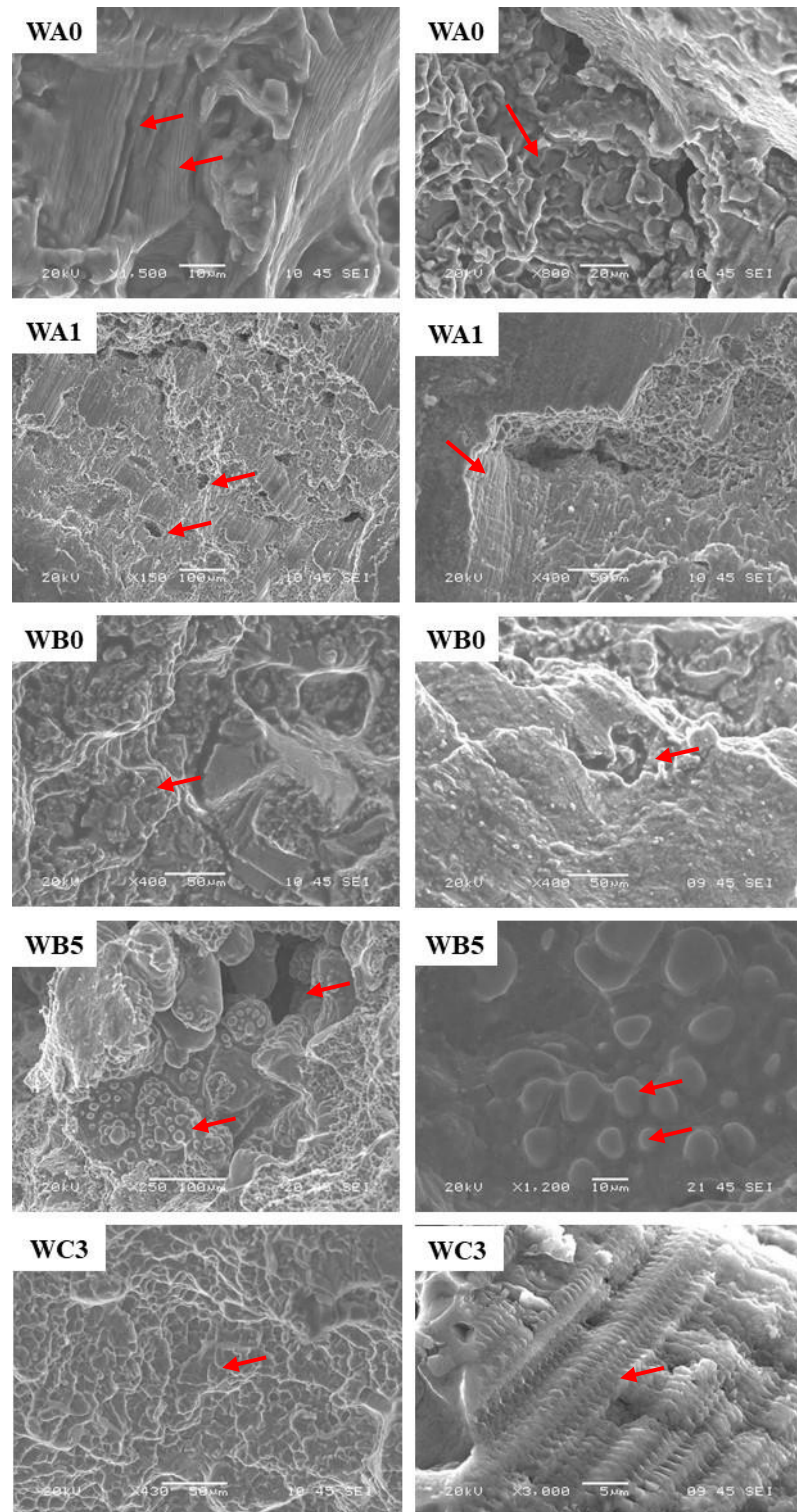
SEM imaging of the fracture surface of some control arm samples.
